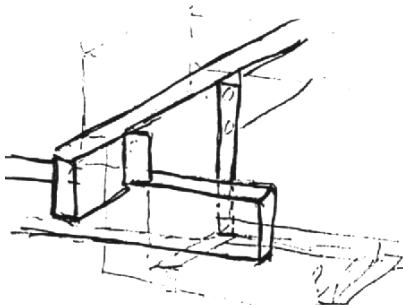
Plate welded to the rear axle for carrying the batteries and to be assembled with the left side member.
